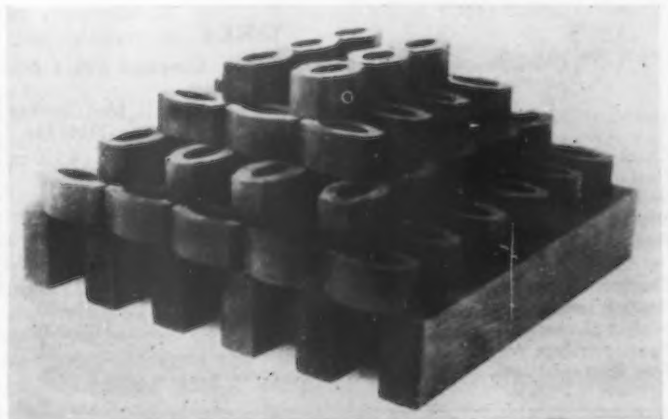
Copper stool which is 60 x 39 x 8 in. in size and weighs 5747 lb. This type of stool is cast vertically in a water-cooled mold. Four cast-iron centering lugs can be bolted on if they are desired.
